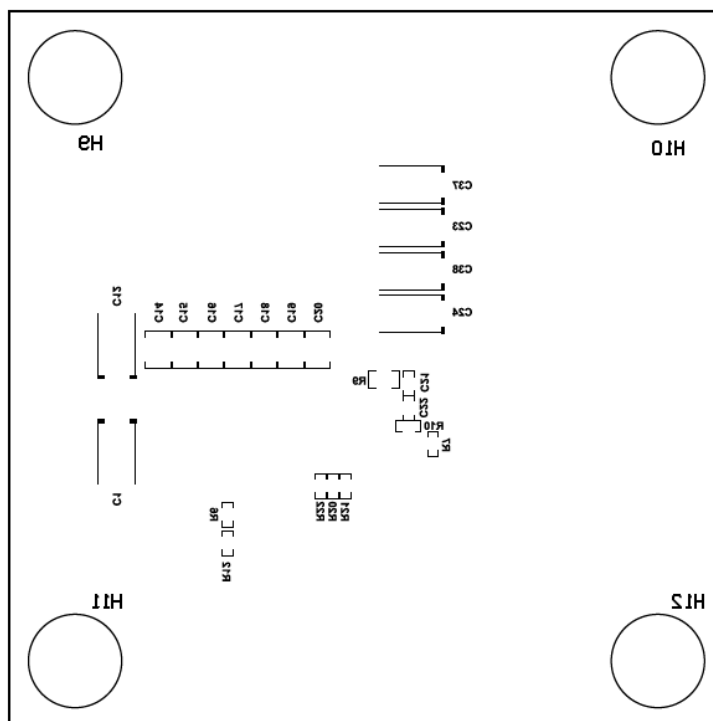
PWR-784EVM Bottom Overlay Layer (Top View)
